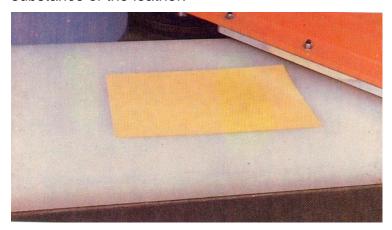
Place 1 piece of thin cardboard on the clicking board.
